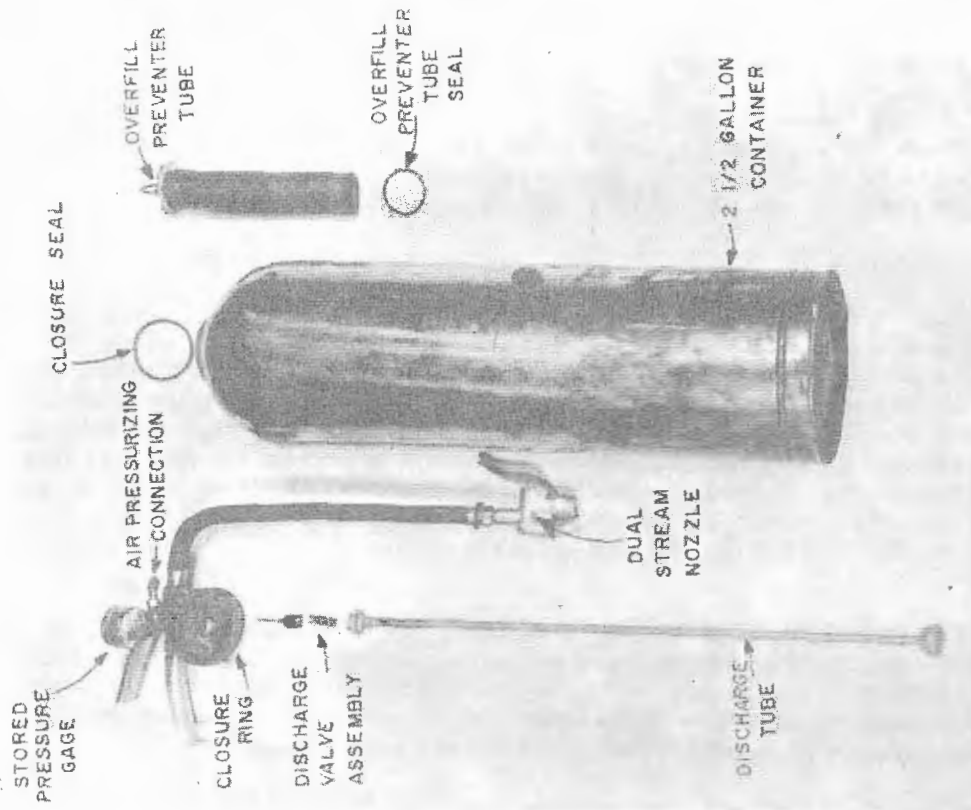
Exploded view of final prototype 2-1/2-gallon extinguisher for TMB
